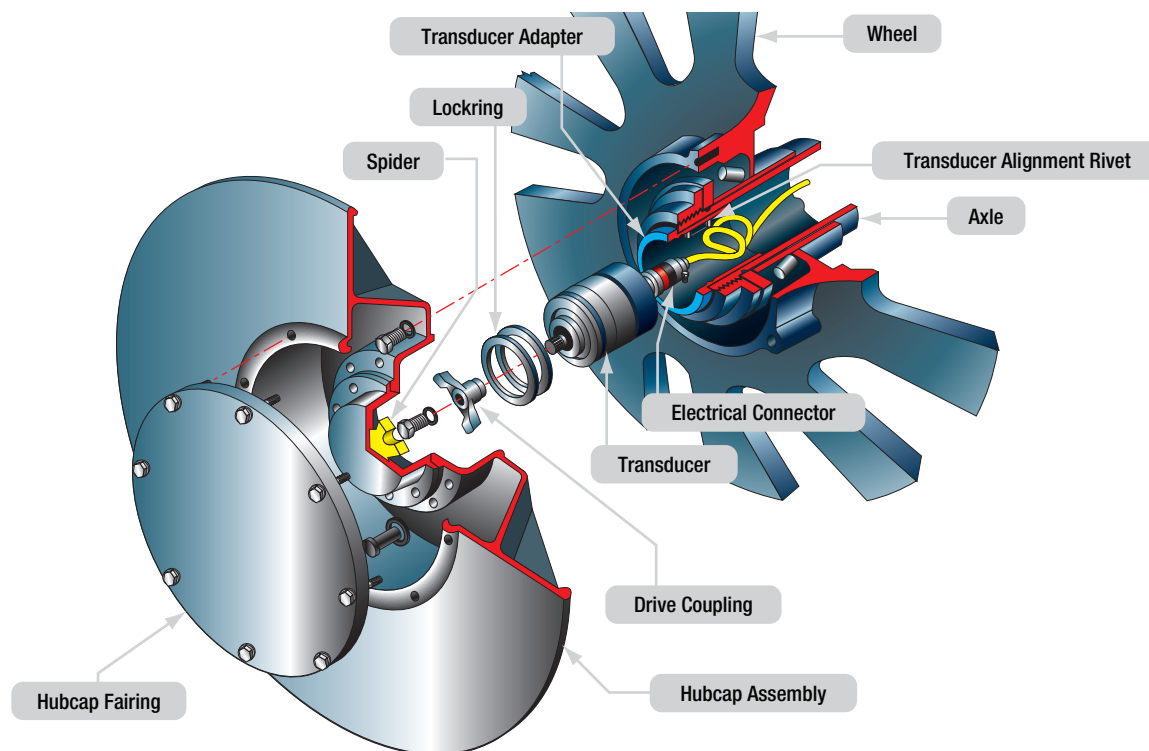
The stator of an antiskid wheel sensor is mounted in the axle, and the rotor is coupled to the wheel hub spider that rotates with the wheel.
